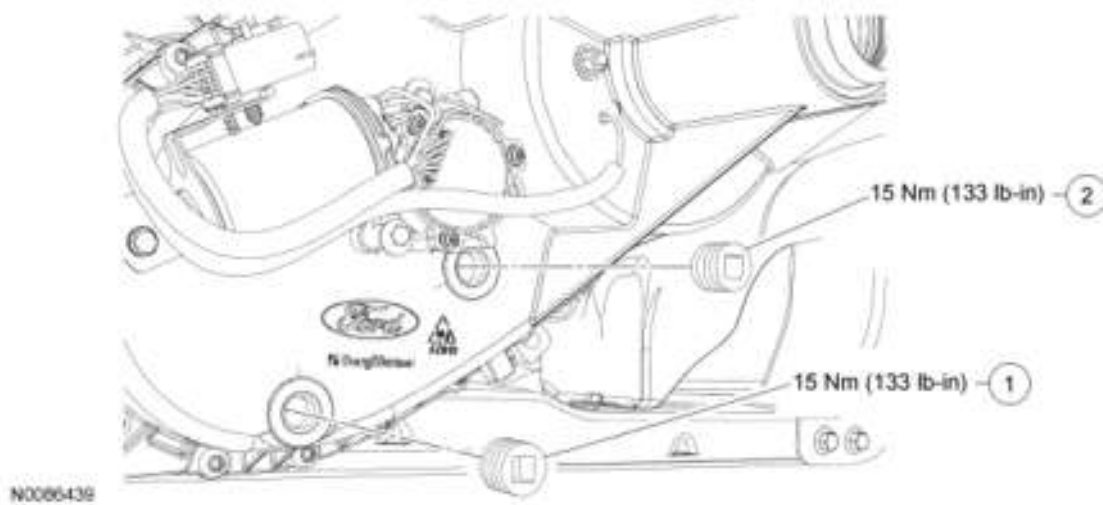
Identifying Drain Plug And Fill Plug With Torque Specifications
